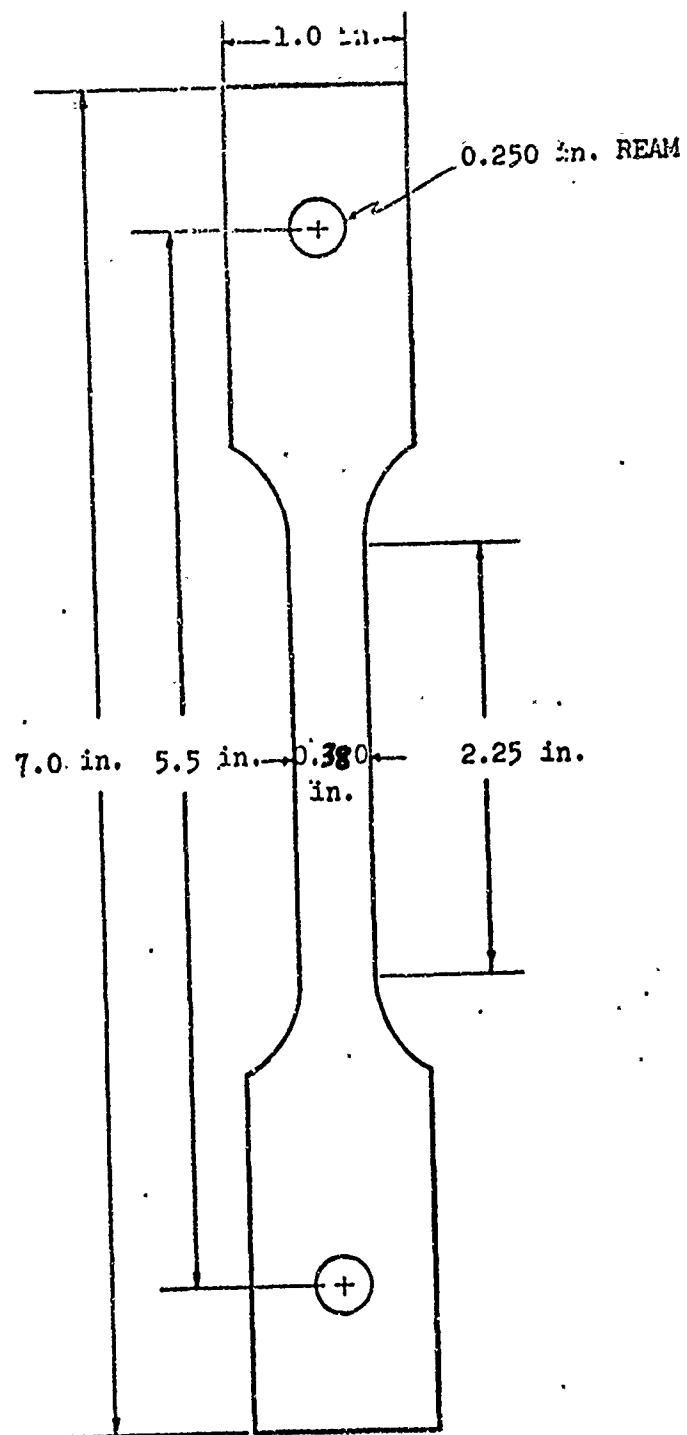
UNIAXIAL TENSILE TEST SPECIMEN.
